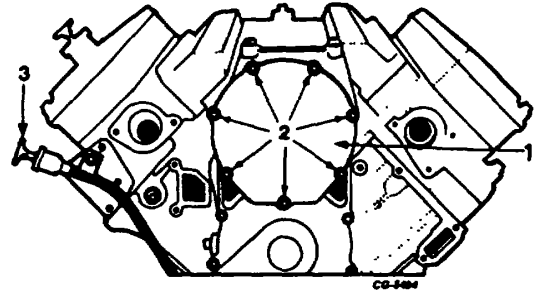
Removing Injection Pump Drive Gear Cover and Dipstick
